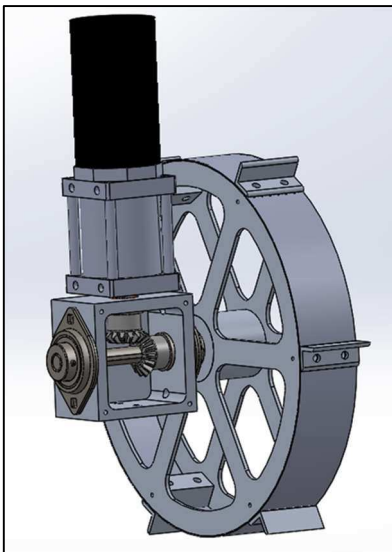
Mobility on SCOOPS. Note the clear side of gearbox for easy viewing.
